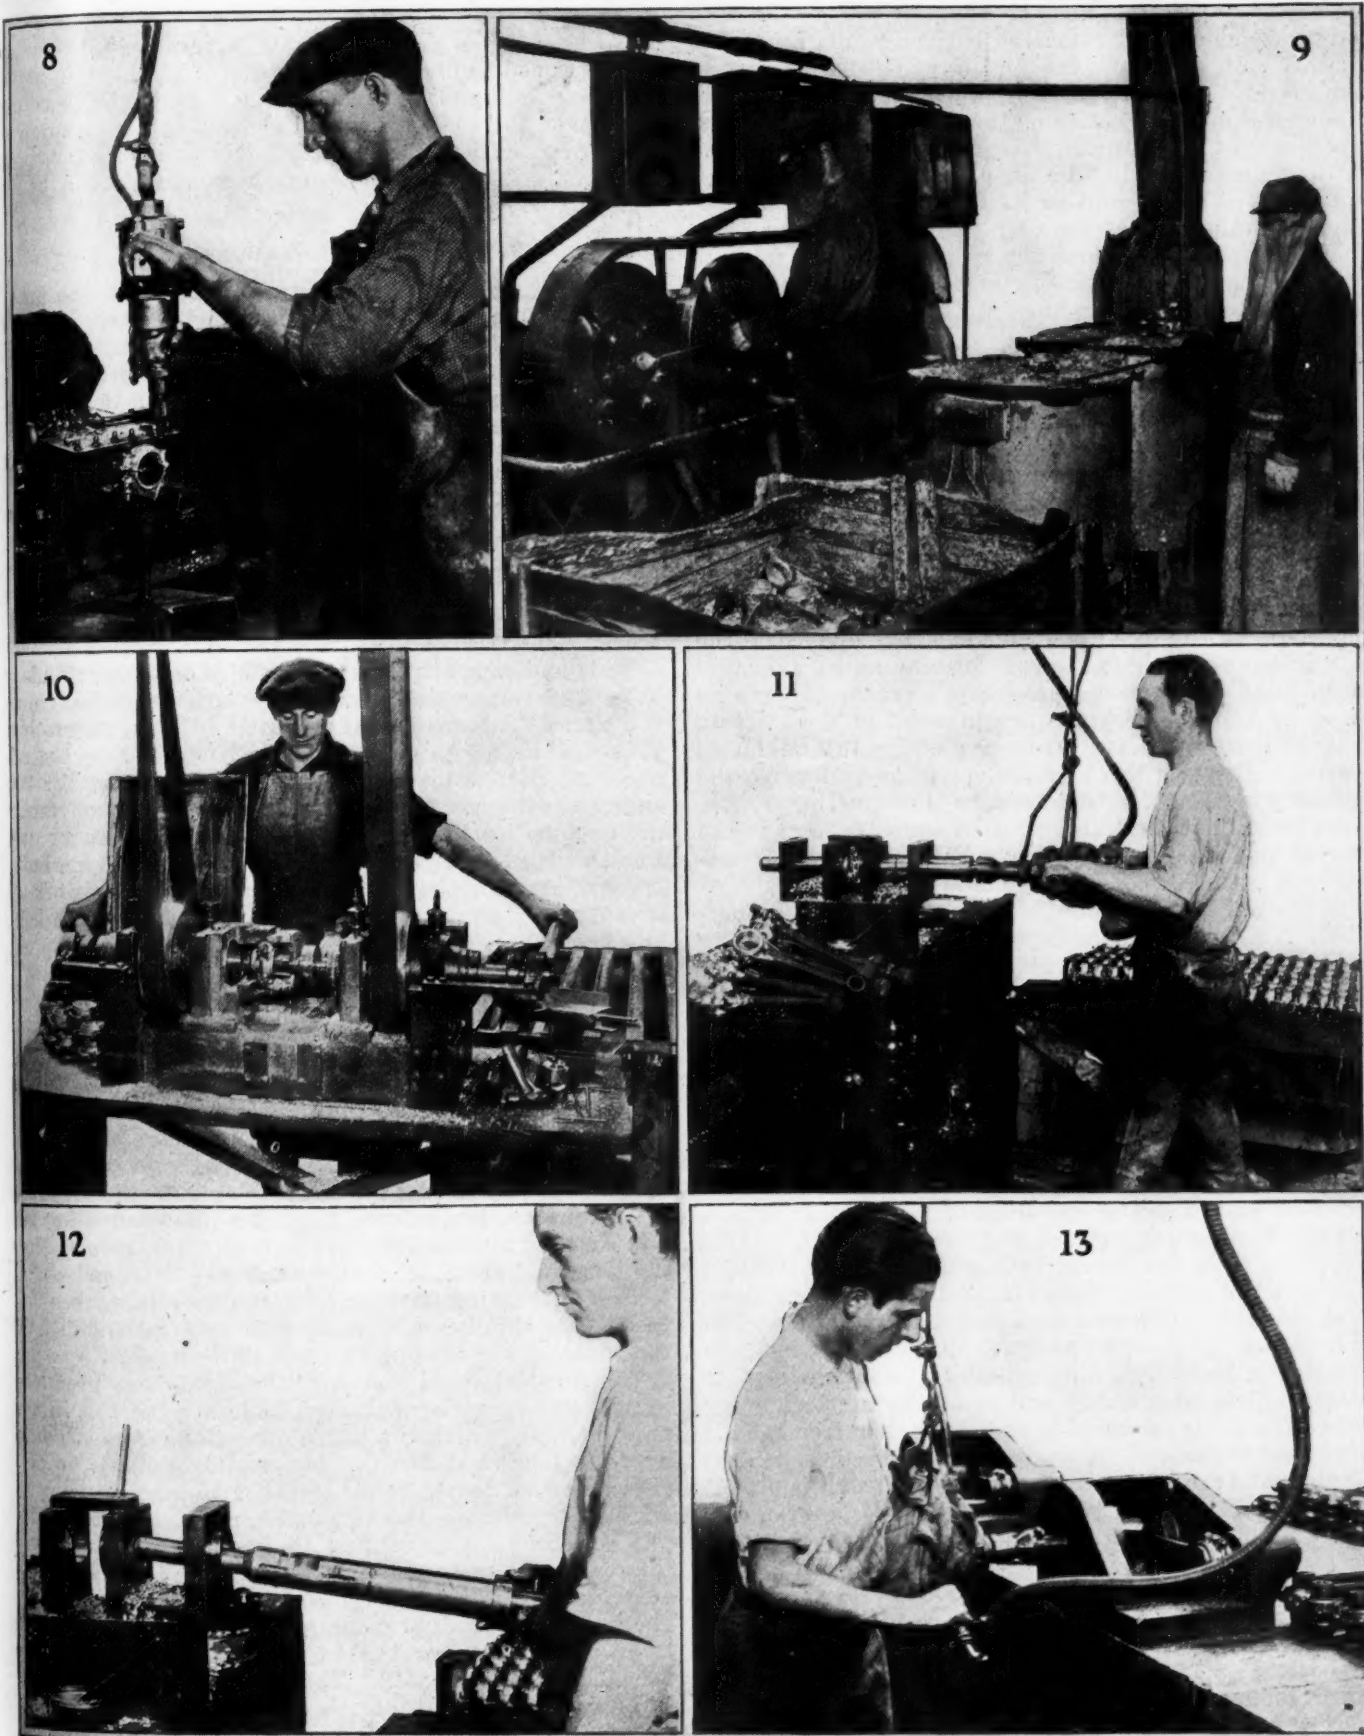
Bolting on caps in bench fixture. Fig. 9—Babbitting and tinning line. Fig. 10—Double-end machine for semi-finishing bore and finishing ends of babbitt bearing. Fig. 11—Finish reaming babbitt bearing. Fig. 12—Close-up of finishing reamer. Fig. 13—Line reaming piston pin bearing.
